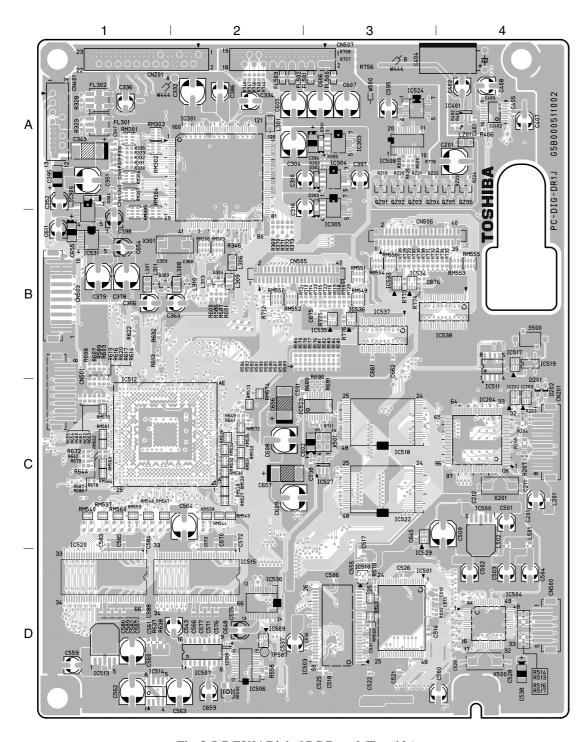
EU01 Digital PC Board (Top side)
